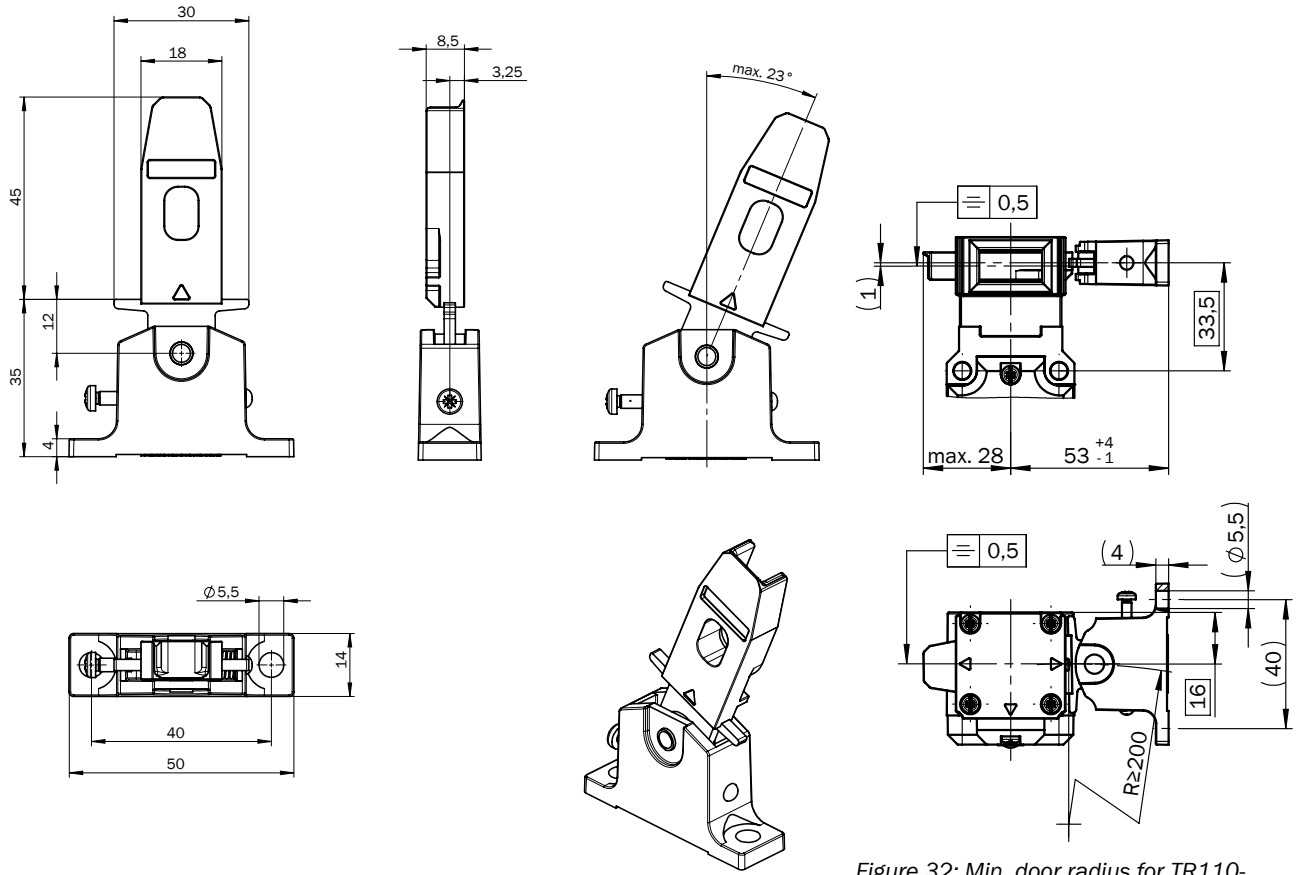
Dimensional drawing of TR110-XAFR hinged actuator (mm)
